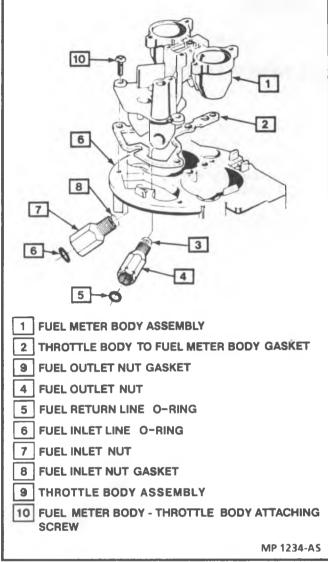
Fuel Meter Body Assembly - TBI 220
